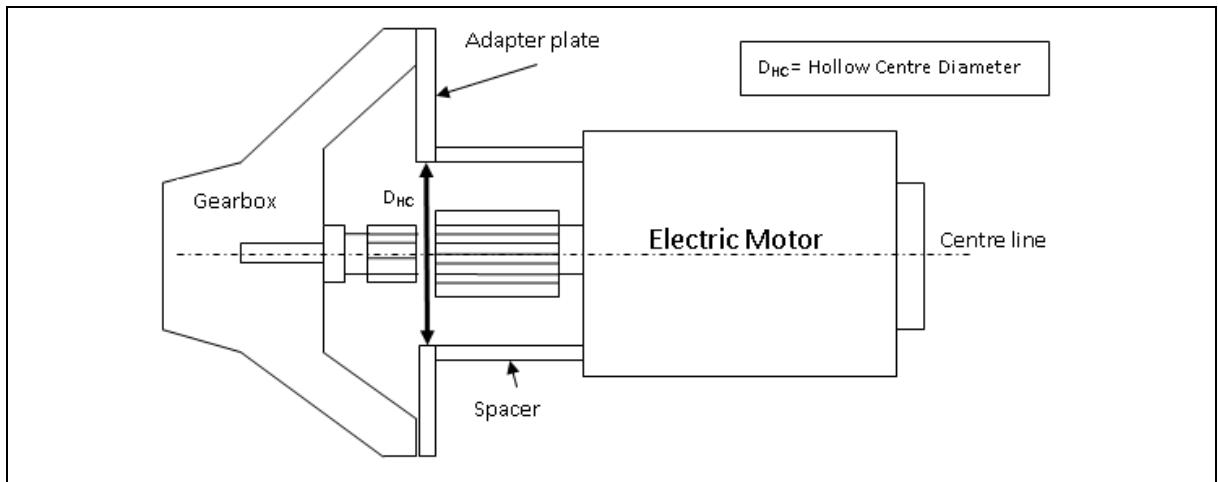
The schematic diagram of adapter plate and spacer assembly
